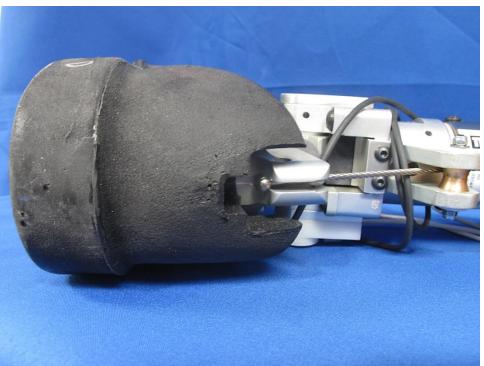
Attach ball end of Achilles cable to lower Achilles mounting post
